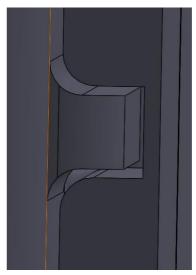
Highlighting the clearance fit in sliding mechanism for the drip tray and drip tray housing
